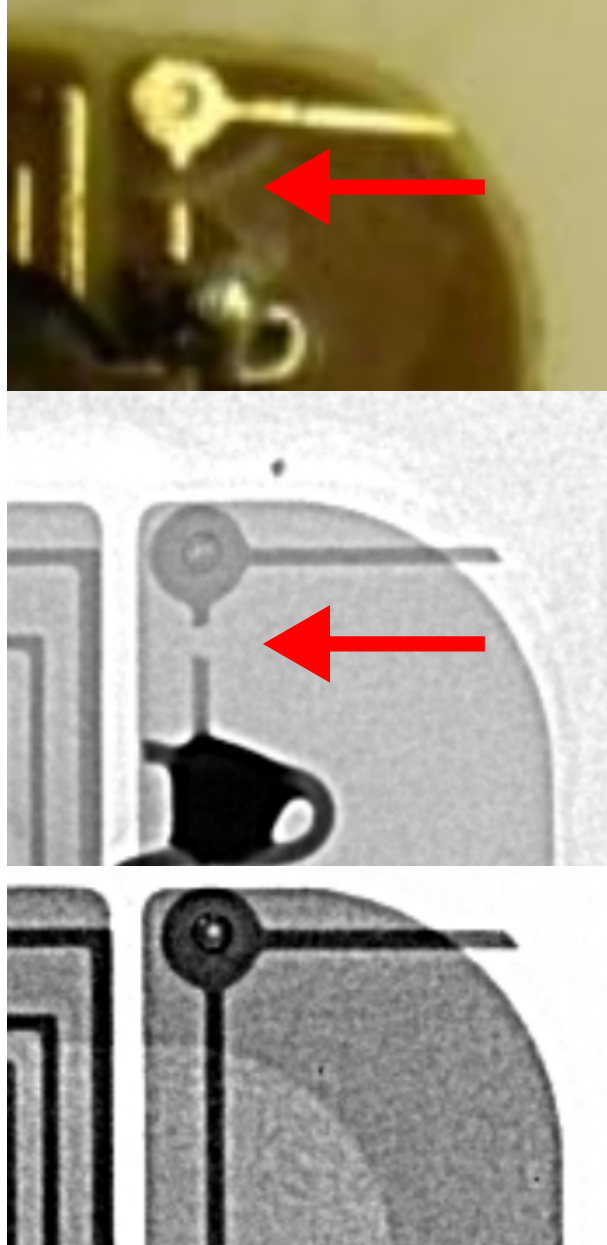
(1) FUN card module; (2) genuine stolen card; (3) welded wire.
